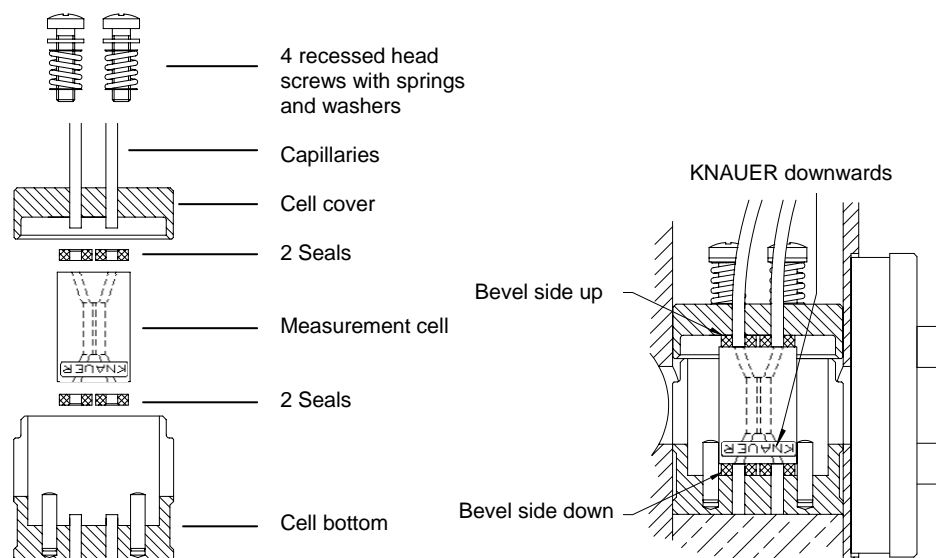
Layout of 15° measurement cell (left); and orientation on the optical bench (right)
